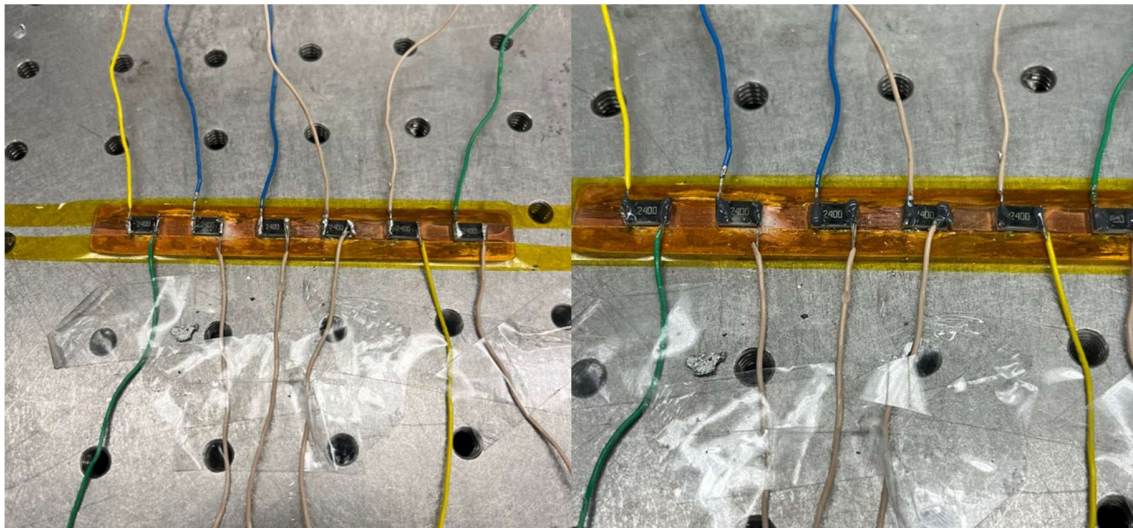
Insulation and reinforcement of the copper heater assembly. Thermal tape used to electrically isolate critical regions during assembly (left). Epoxy applied over the soldered connections for mechanical support and protection (right).
